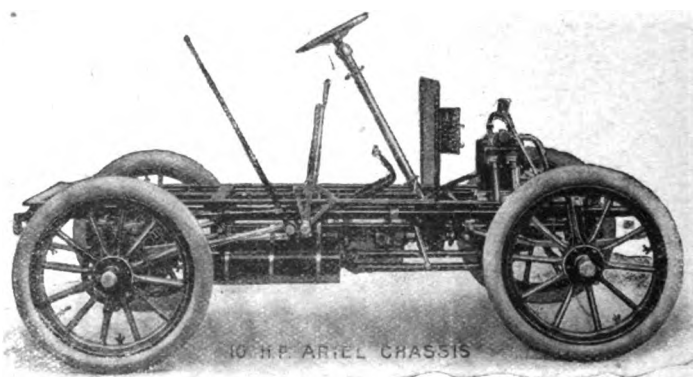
Chassis of Ariel 10-h.p. Car.
